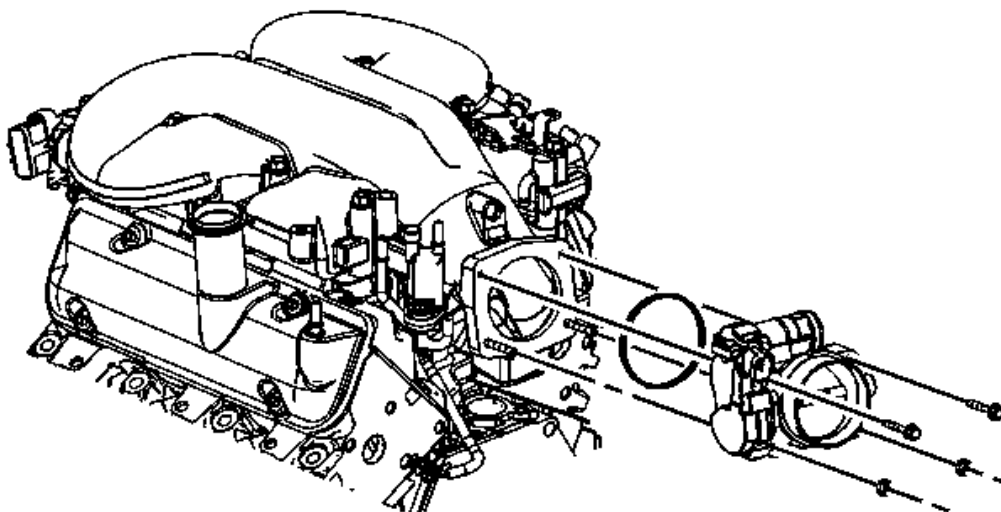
Throttle Body, Bolts, Nuts & Gasket
